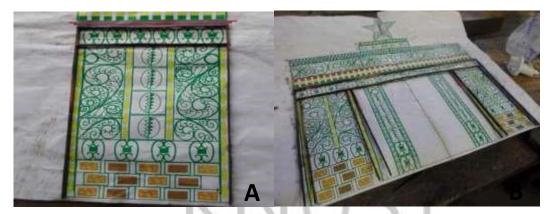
A and B: Crosschecking assembled cut out wires that have been soldered
